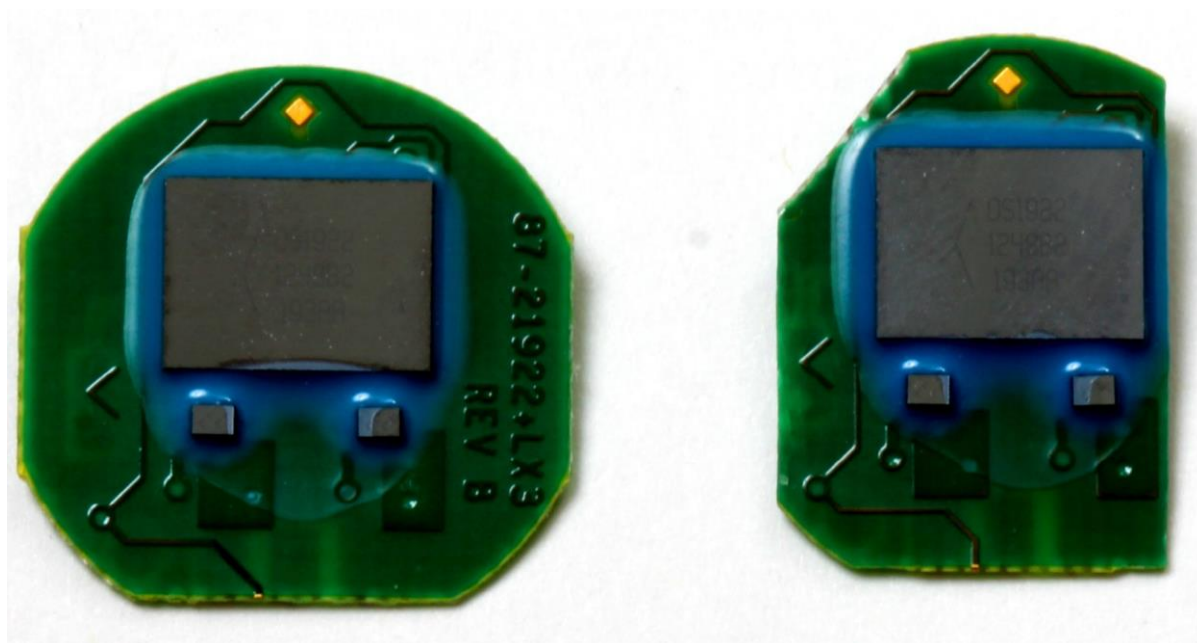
The reverse side of the circuit board both before cutting (left) and after cutting (right).
